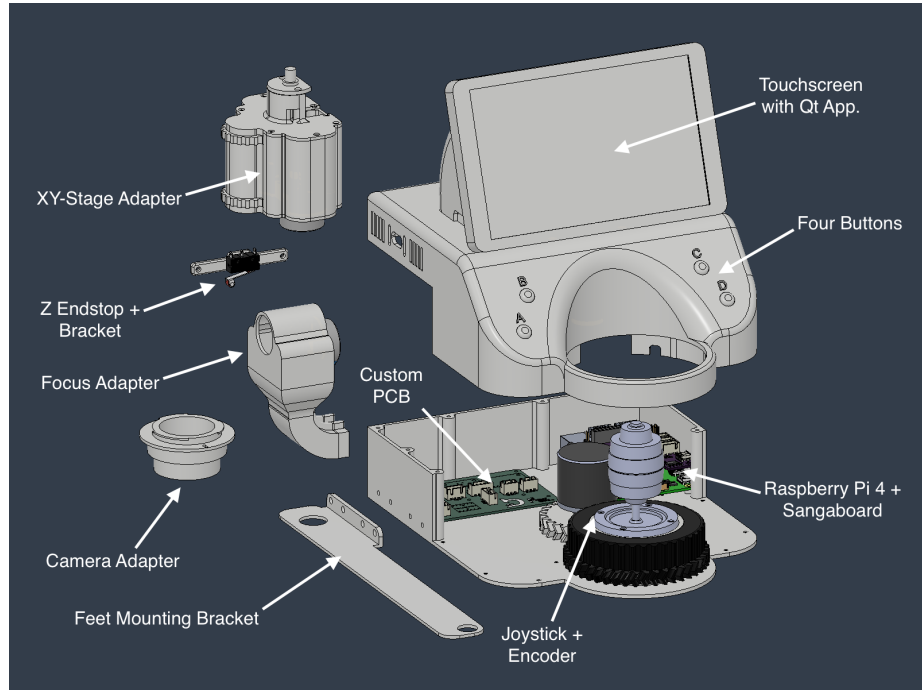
Exploded render of the RetroScope prototype. The view separates the printed enclosure, joystick and encoder assembly, Raspberry Pi and Sangaboard electronics, custom PCB, feet mounting bracket, focus adapter, Z endstop bracket, XY-stage adapter, and camera adapter.
